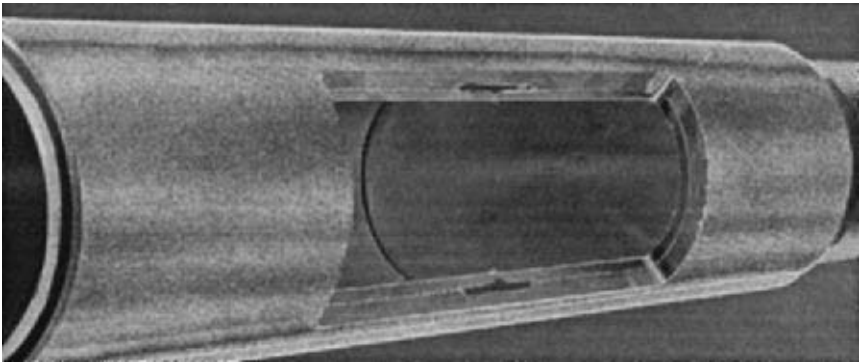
Weldless coupling system for internal and/or external FBE coating
